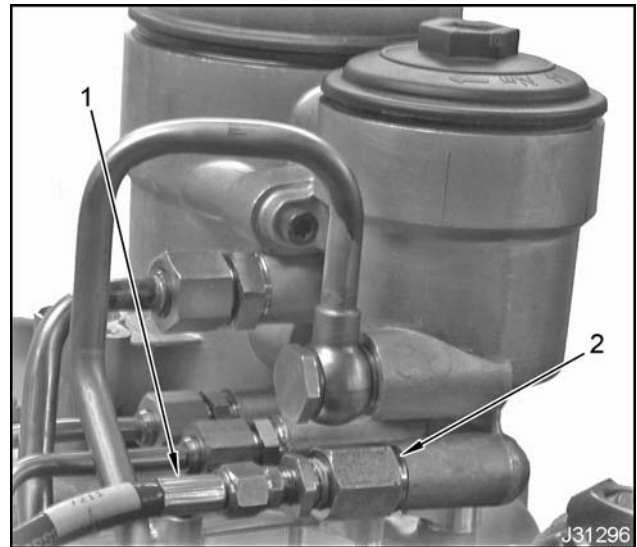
ICP System Test Adapter installed with Fuel Pressure Gauge
